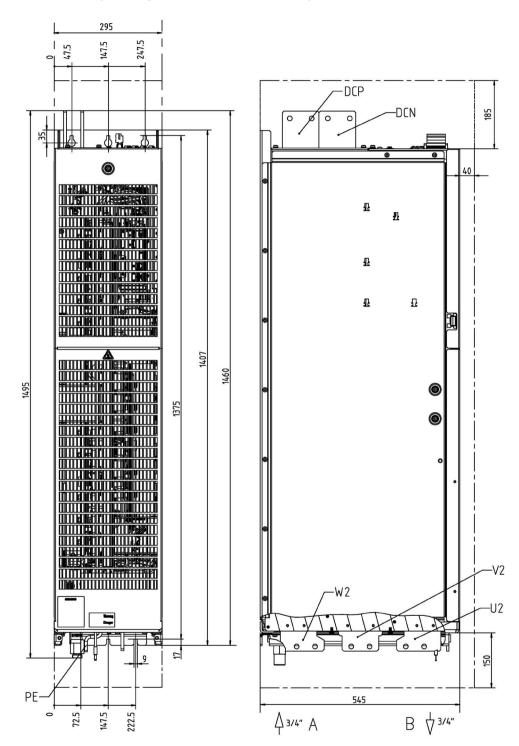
Dimension drawing Motor Module, frame size JXL, article numbers 6SL3325-1TE41-0AA3, 6SL3325-1TE41-4AA3, 6SL3325-1TG38-1AA3, 6SL3325-1TG41-0AA3, 6SL3325-1TG41-2AA3, 6SL3325-1TG41-3AA3. Front view, side view
